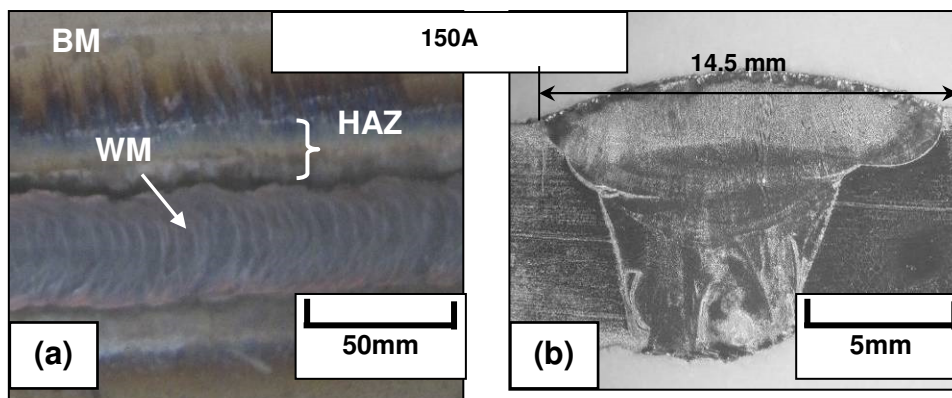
Photograph of face side (a) and macrograph of a cross section (b) of GTA butt welded joint produced using 150A welding current, 15V welding voltage, 135mm/min welding speed, 15 l/min argon shielding and 0.05% oxygen in purging gas.
